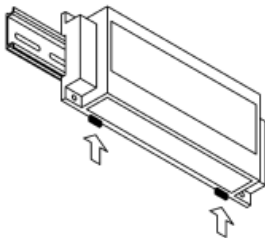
Mounting on a DIN Rail < 3 / 3 >
